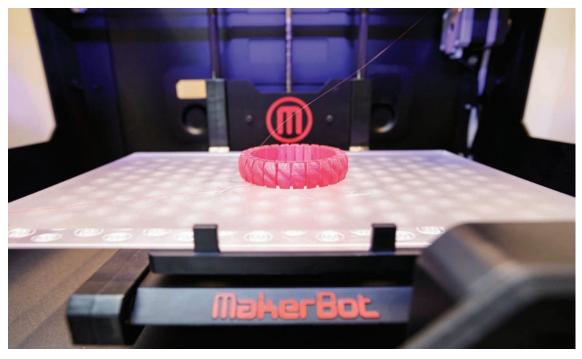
A flexible plastic bracelet printed by a 3D printer
